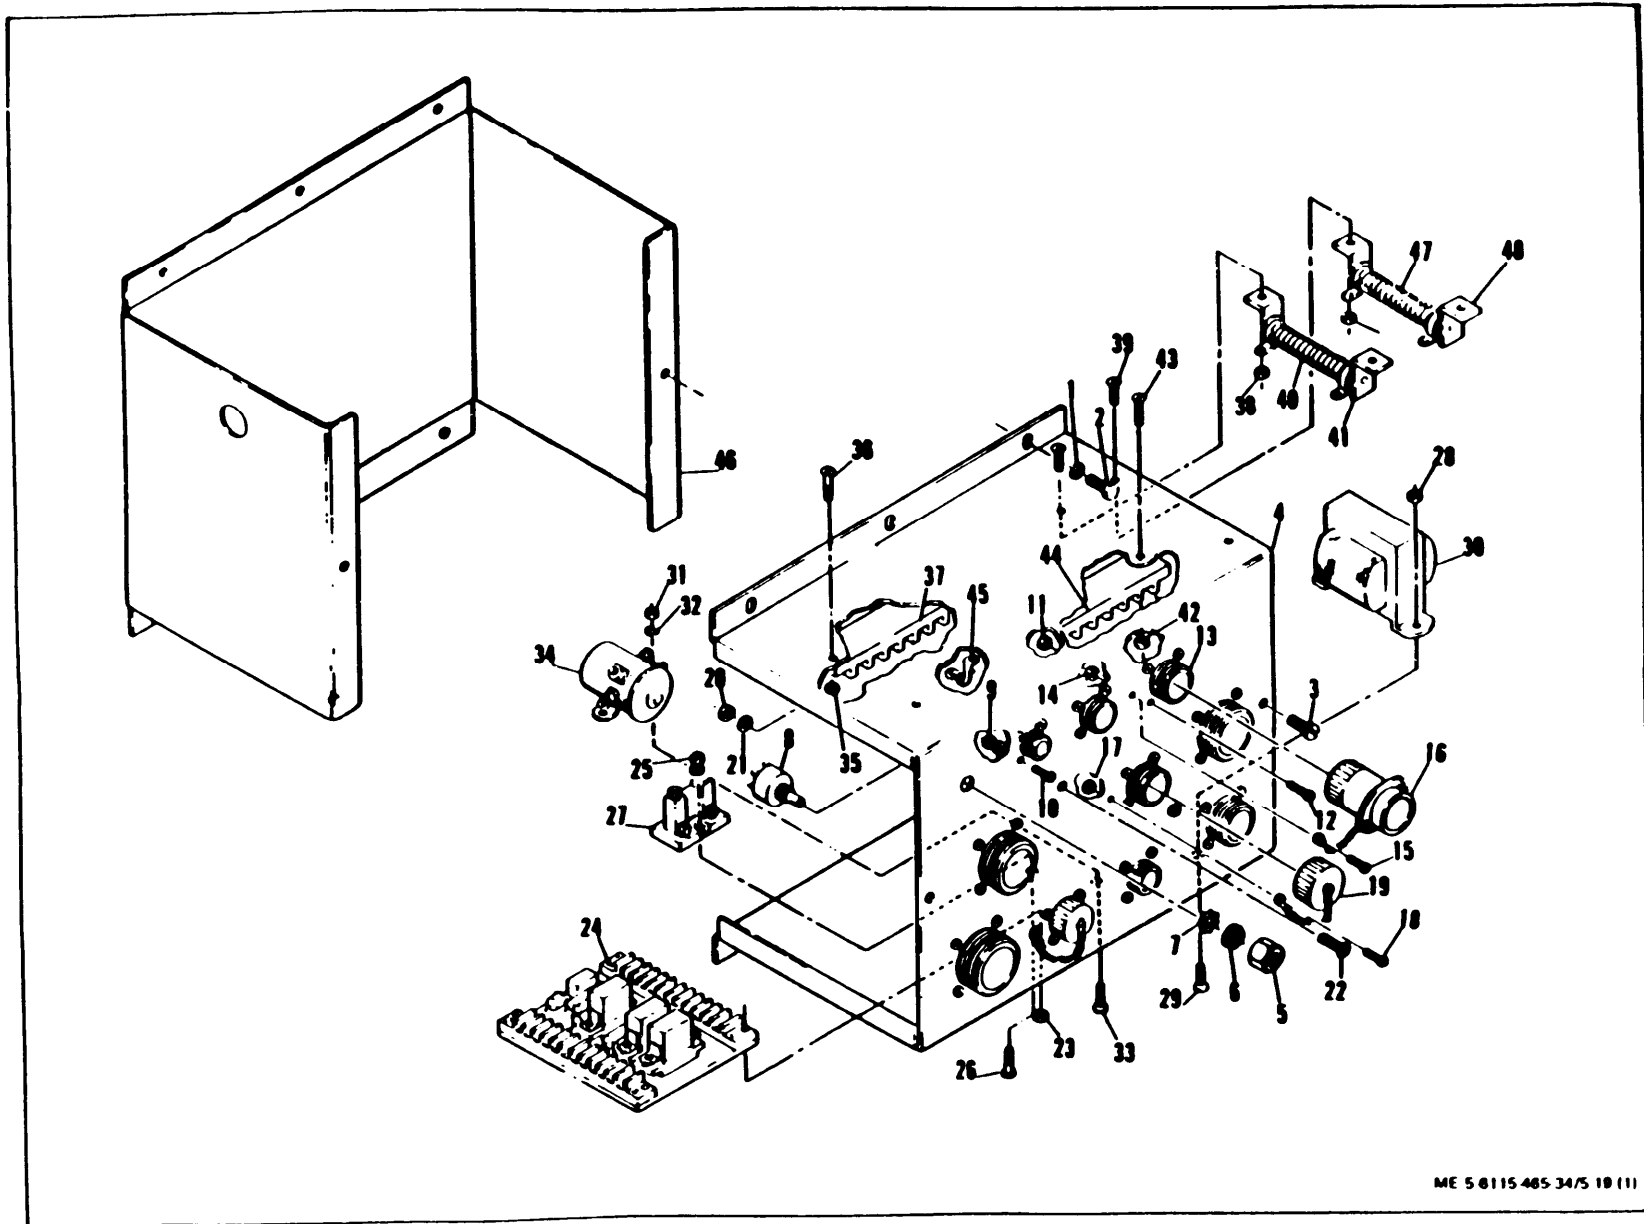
Special Relay Assembly, Exploded View (Sheet 1 of 2)
